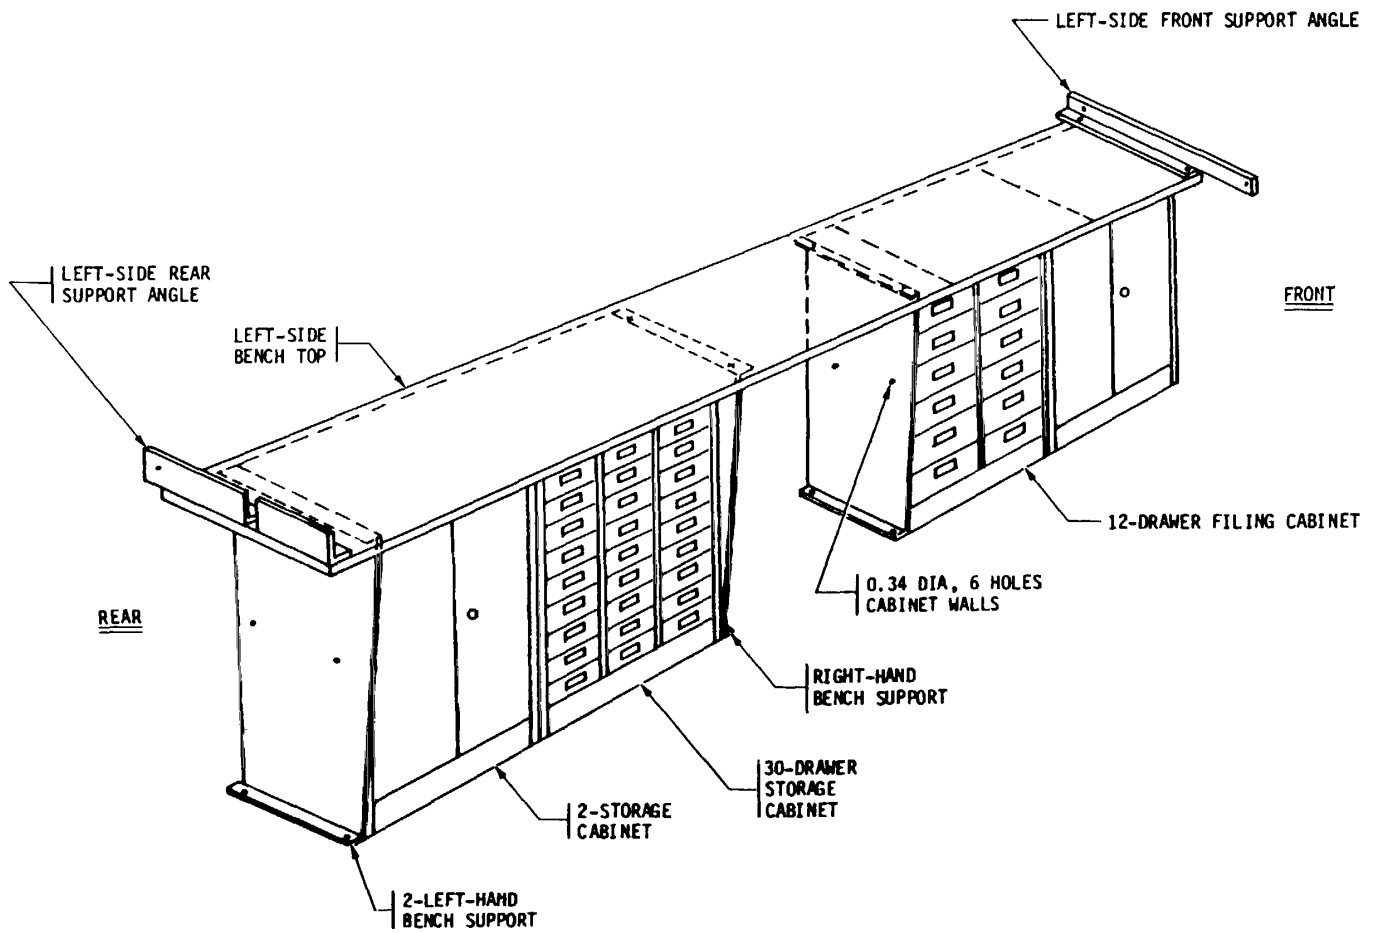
Storage Cabinet Installation Left Side, Components to be Mounted, Unit 1, 280.
